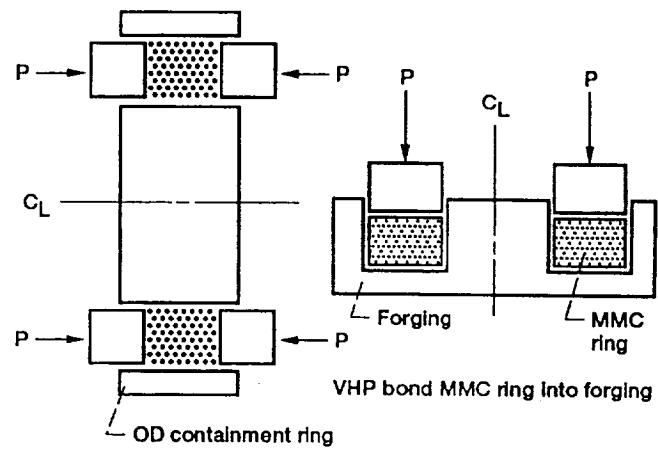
Fabrication of the integrally bladed MMC rotor.
